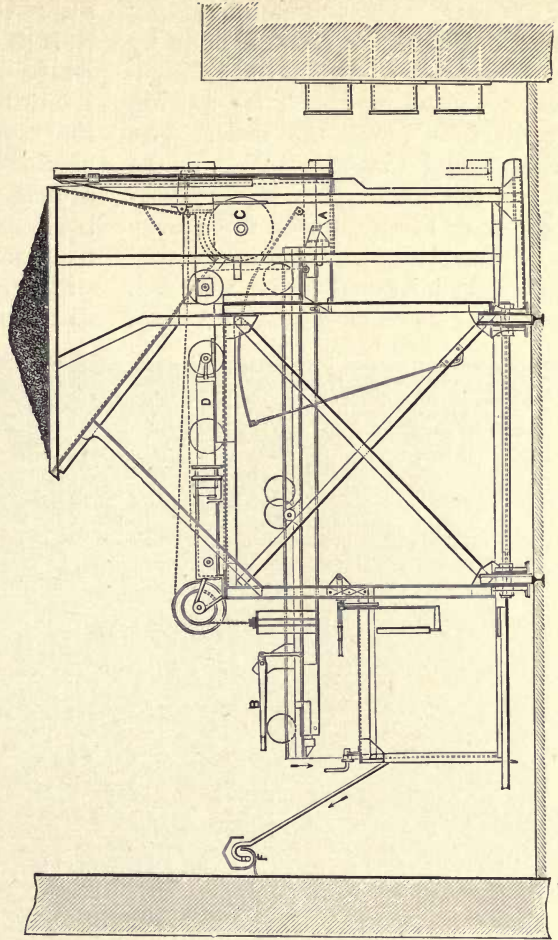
OUTLINE OF ARROL-FOULIS HYDRAULIC CHARGING MACHINE.
